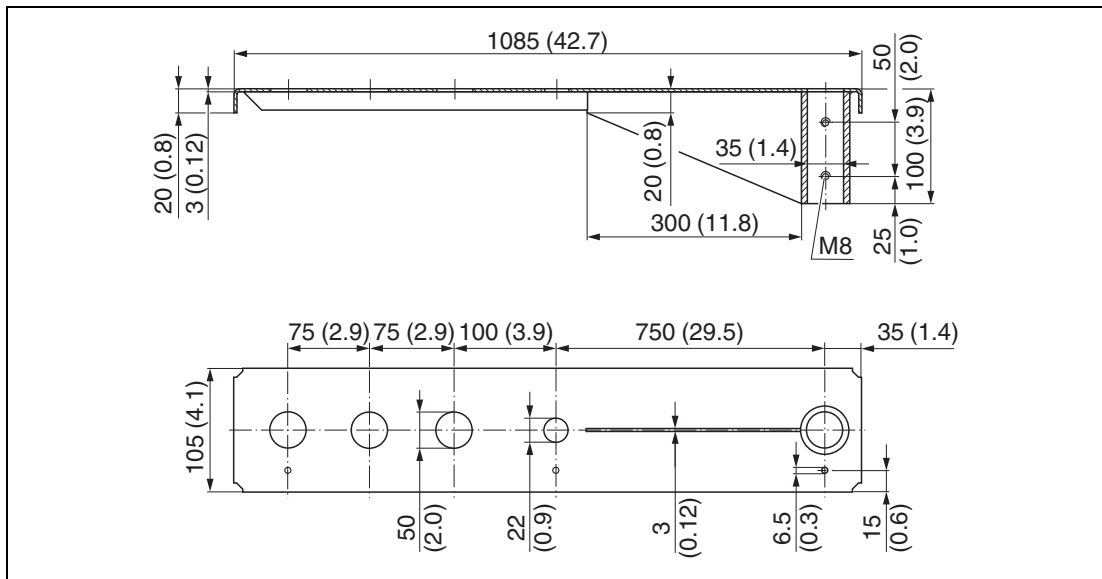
Dimensions of cantilever (long) with pivot for G1-1/2 sensor process connection on front, engineering unit: mm (inch)
